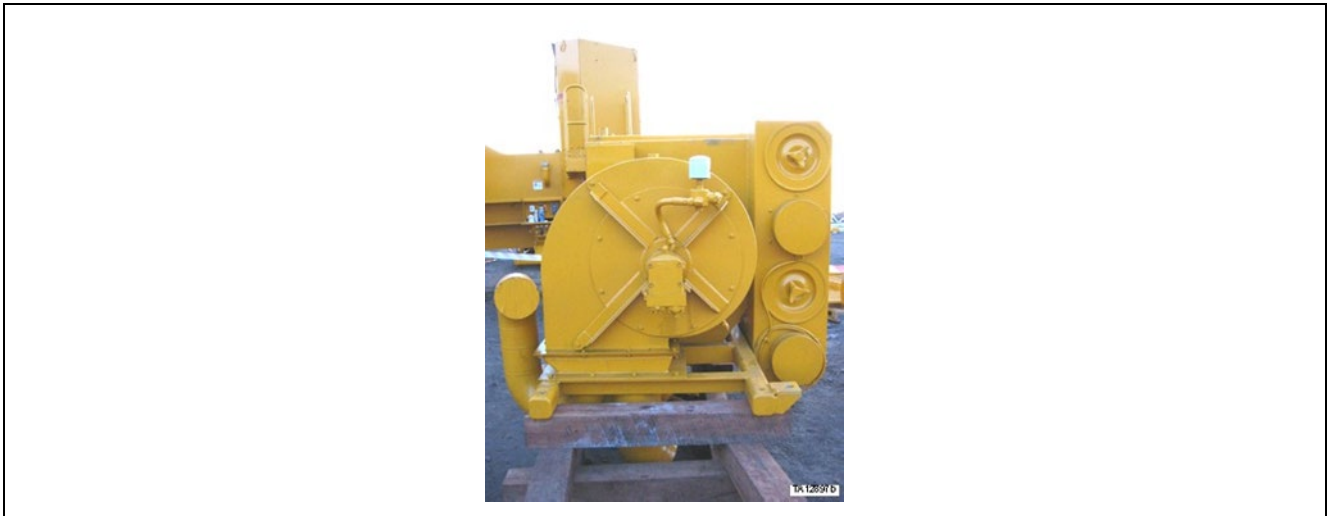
KLENZ™ and blower assembly supported by cribbing 2 of 3
